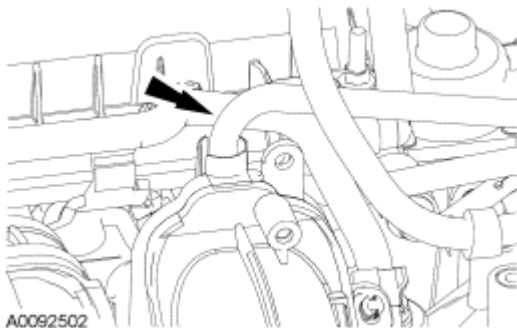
Locating Secondary Air Injection Vacuum Supply Hose
